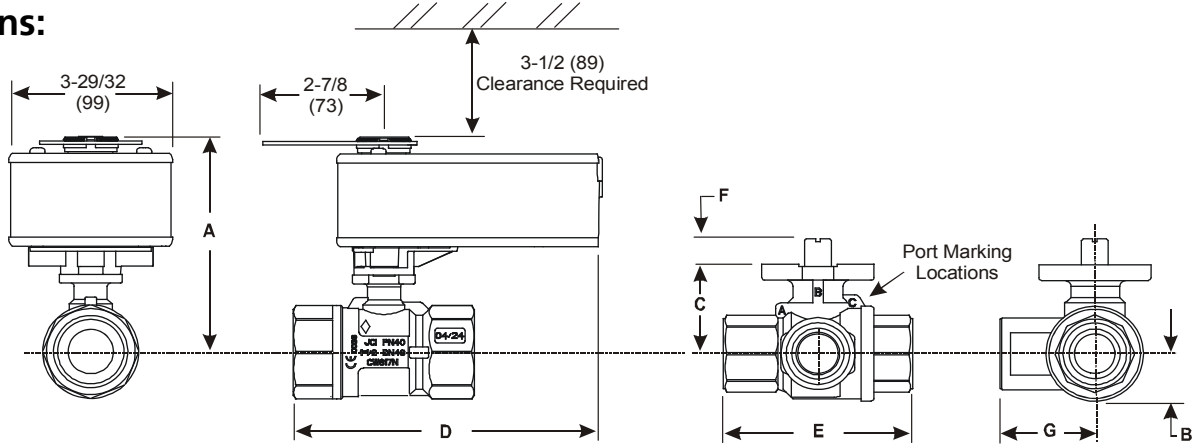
Spring Return VA(M)S-70 Series Ball Valves - Dimensions, in. (mm)
